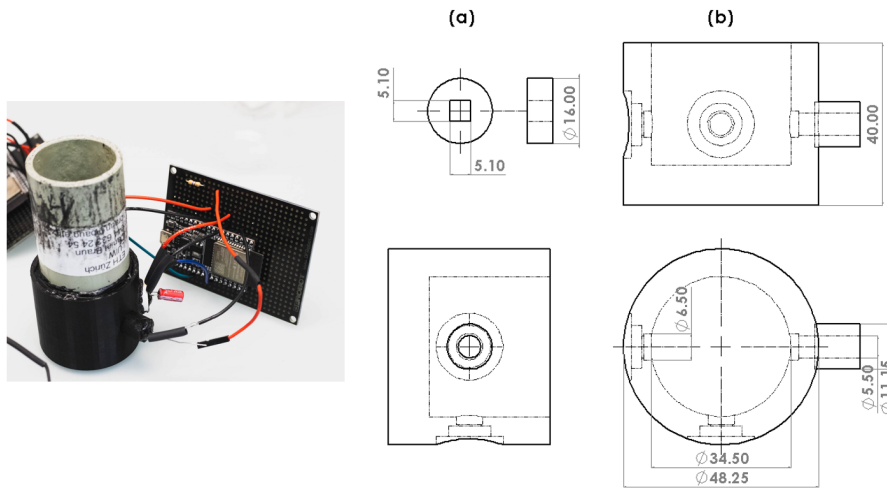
LEFT: First prototype of the turbidity sensor, RIGHT: drawing of the 3D printed sensing head.
